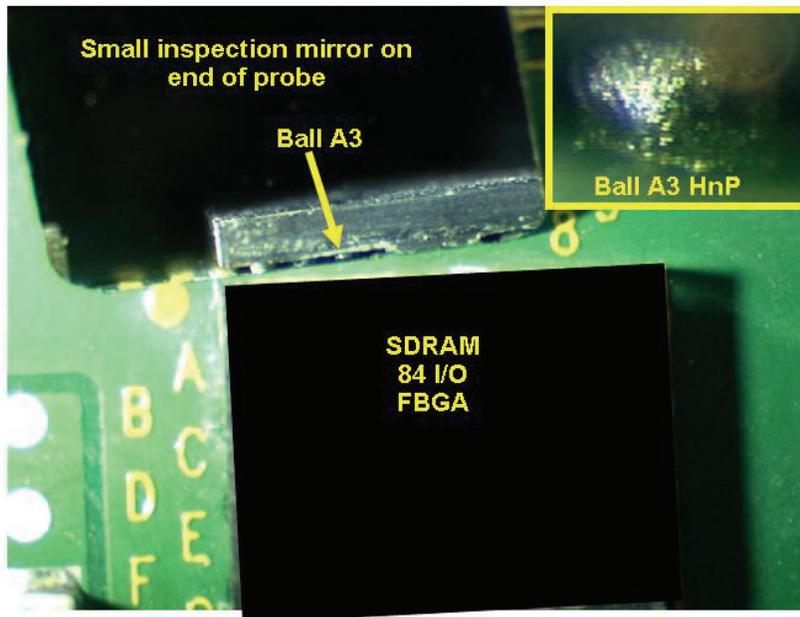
HnP defect on 84 I/O SDRAM FBGA. The optical inspection system or microscope and mirror may be useful for a BGA not near the PCBA edge but these are difficult to use, have marginal image quality, and require operator skill and experience.
